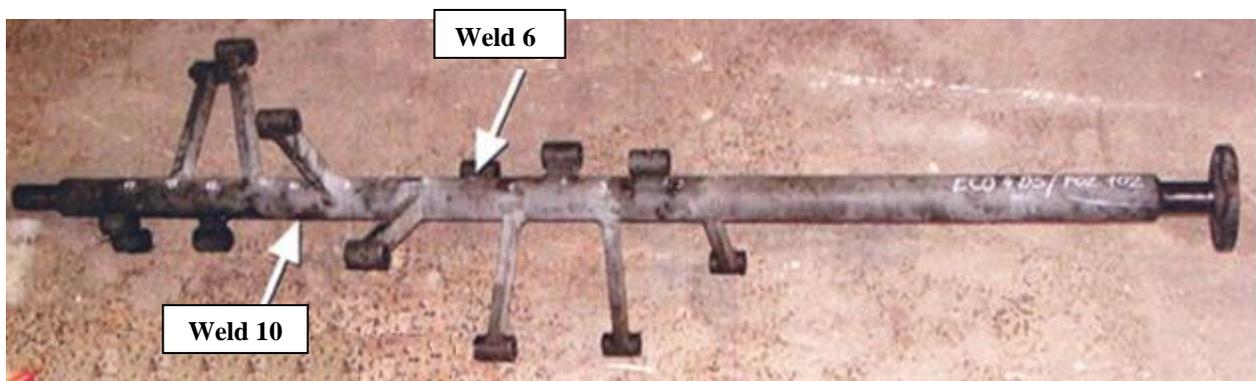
Rapping device's drive shaft with welded radial carriers.
